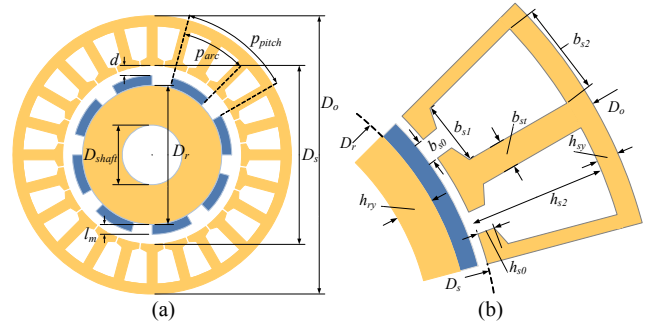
Typical geometrical representation for the examined PMSM design, a) cross section of the whole motor, b) detailed view of the stator slots.
